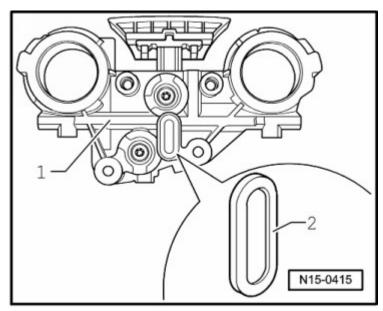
Backside Of Control Housing & Screen Courtesy of AUDI OF AMERICA, LLC
